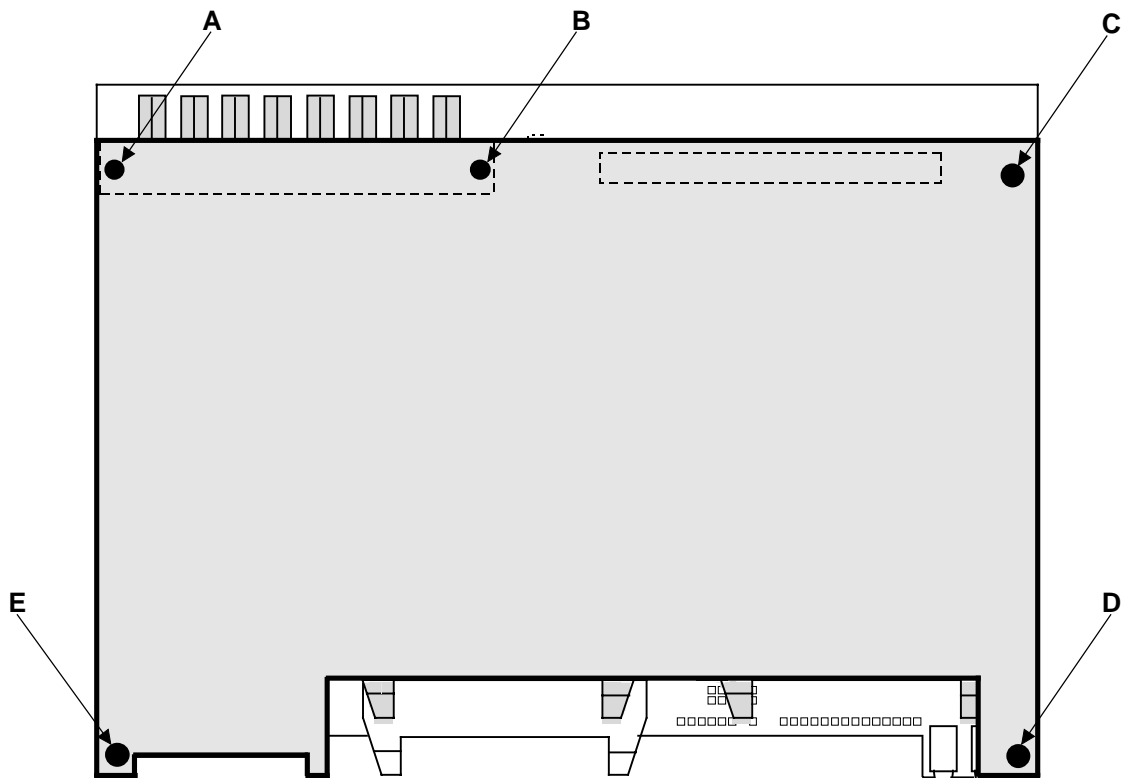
DVH module, view to MVH-p-c board (flow-soldered side)
